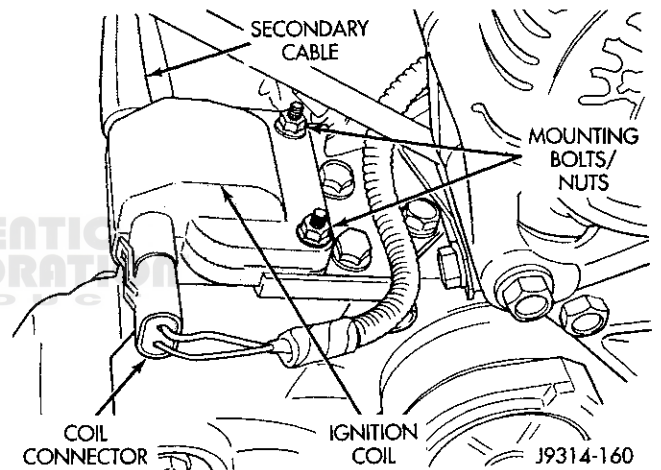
Ignition Coil—5.9L V-8 HDC-Gas Engine
